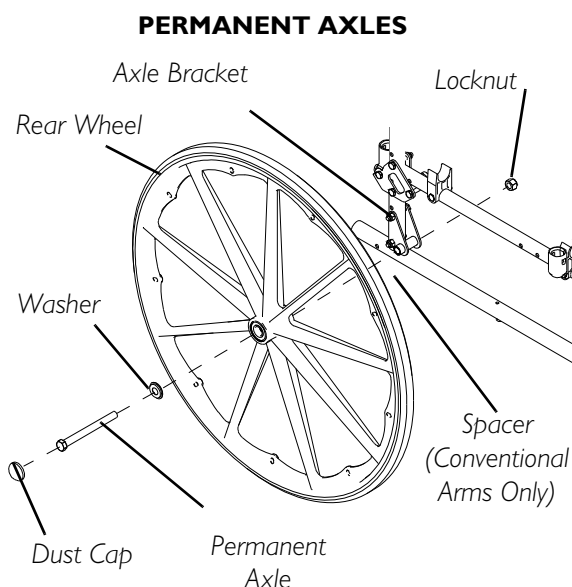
REMOVING/INSTALLING REAR WHEELS
